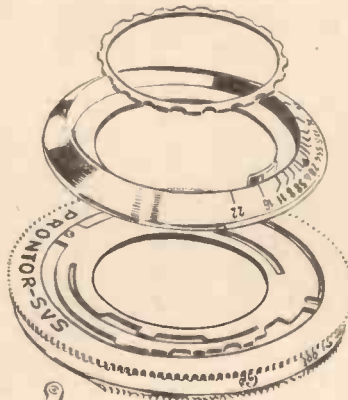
(left).—An exploded view of the Prontor SVS shutter.
